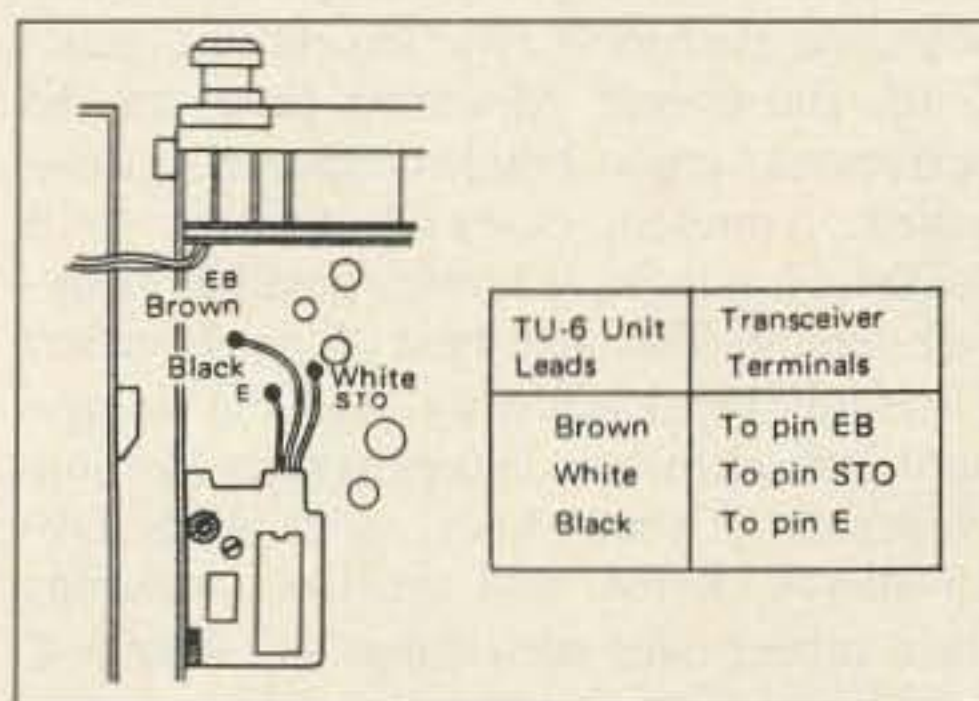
Placement of the TU-6 CTCSS assembly. The assembly is soldered in two places and secured with one screw.
